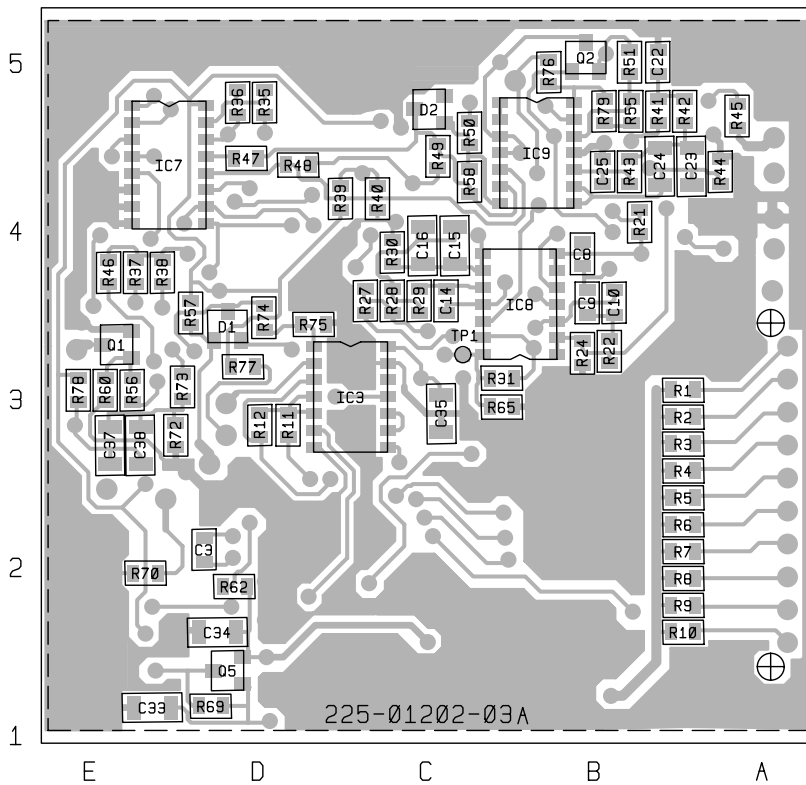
T800-02 PCB Layout - Bottom Side (IPN 225-01202-03)
